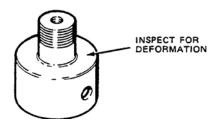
Tube Plug Inspection (Optional Multipiece Sealing Assembly)
